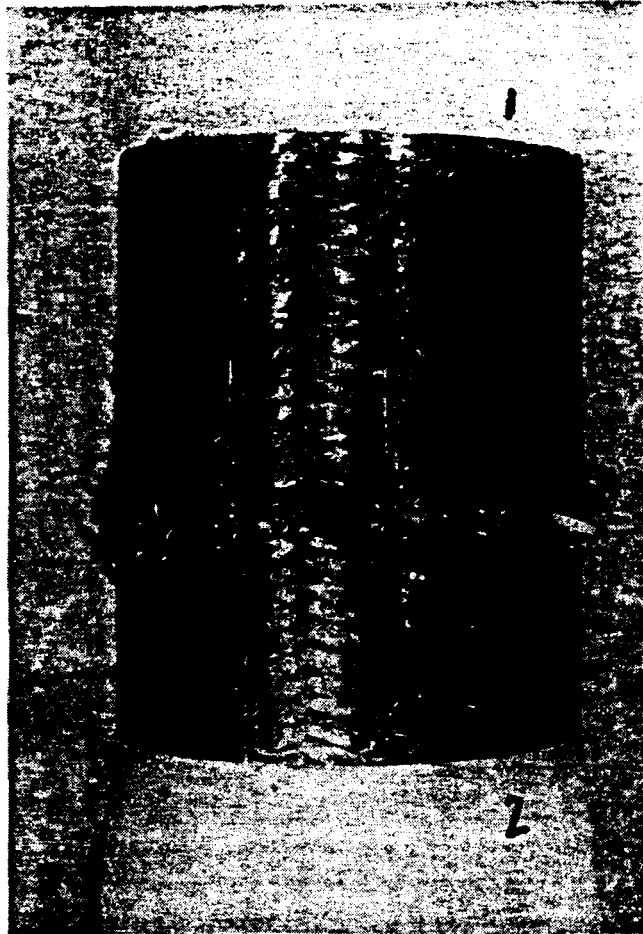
Failed specimen (D architecture) showing typical axial failure mode in compression.
